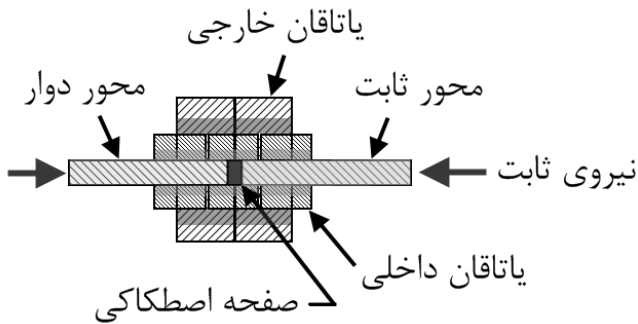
Components of disc brake for adjusting constant torque on rotor axis
